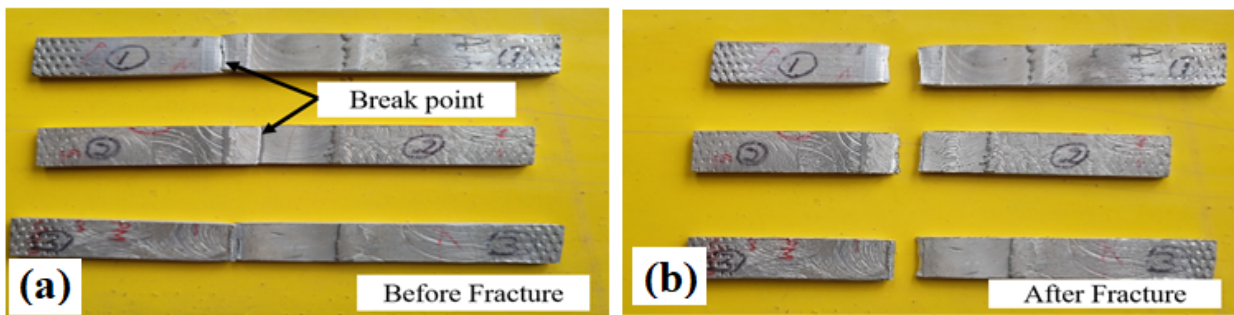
Fractured tensile specimen (a) Before fracture (b) After fracture
